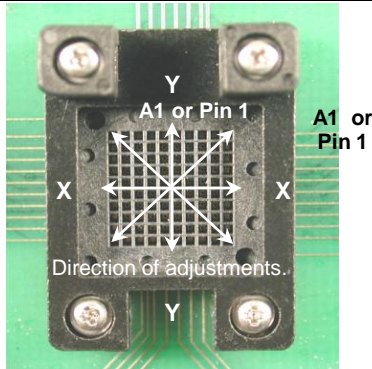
Adjust the alignment gauge on the PC board until the best position is determined.
